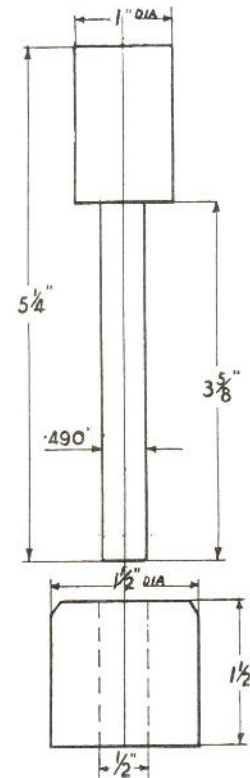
Tools for Replacing Ignition Distributor Bearings.
